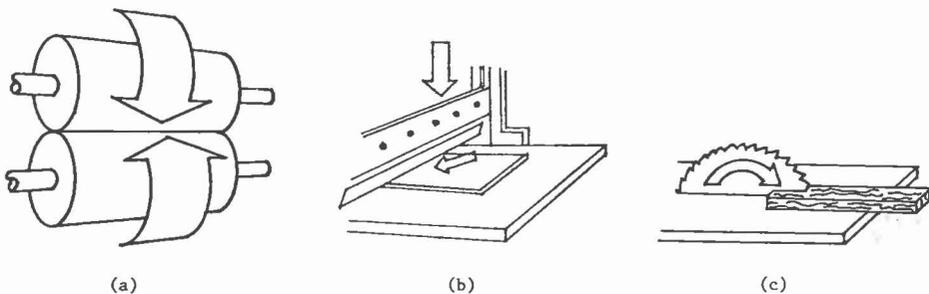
Machine dangers due to (a) in-running nip point, (b) shearing mechanism, and (c) cutting mechanism.
